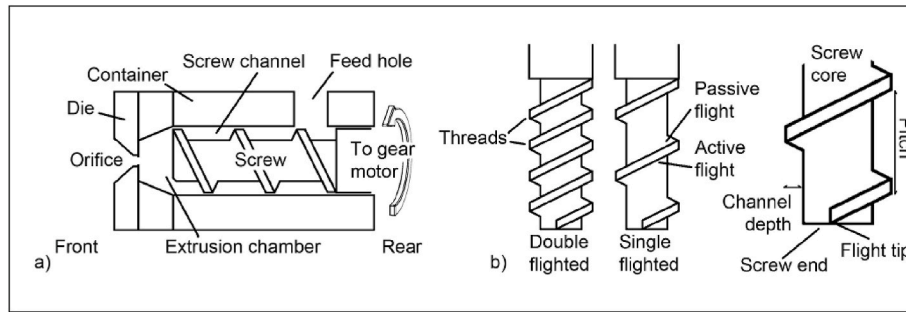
a) Schematic drawings of a screw extruder. b) Geometry of single and double flight screws [63].
